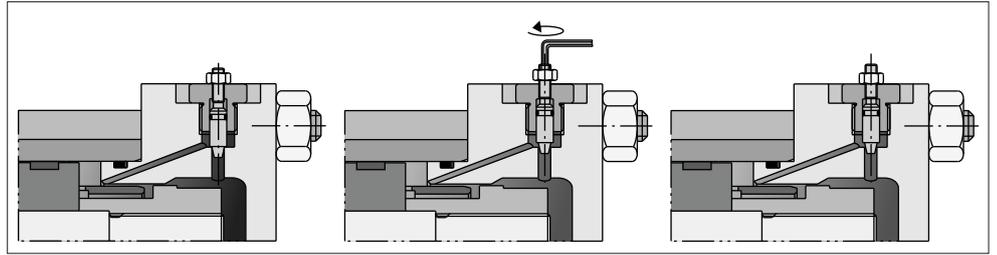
Adjustable end position cushioning with countered throttle bolt
